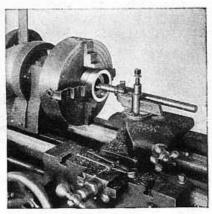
Manufacturing Worm Wheels on an 18-inch Lathe
